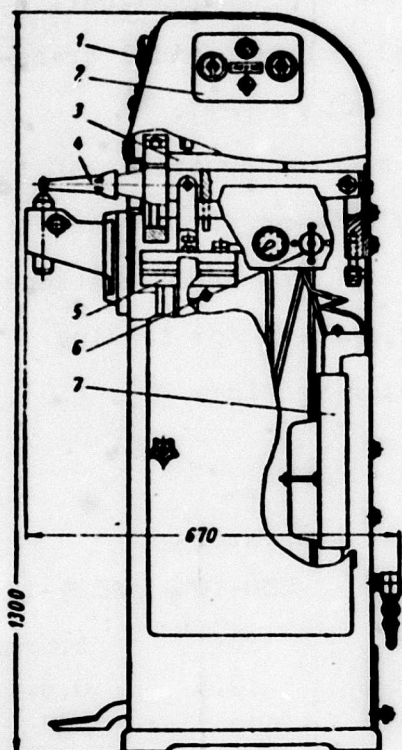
Diagram of unit UZSM-1: 1 - control panel; 2 - electron time relay; 3 - holder; 4 - welding tool with tip; 5 - pneumatic device; 6 - air pressure regulator; 7 - air distributor with electromagnetic drive; 8 - support.
